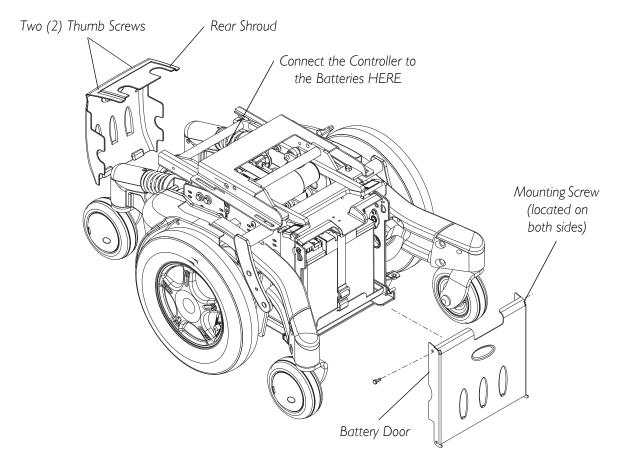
INSTALLING THE BATTERIES (FORMULA INVISIBLE SUPER LOW™ TILT) - INSTALLING THE SHROUD AND DOOR
